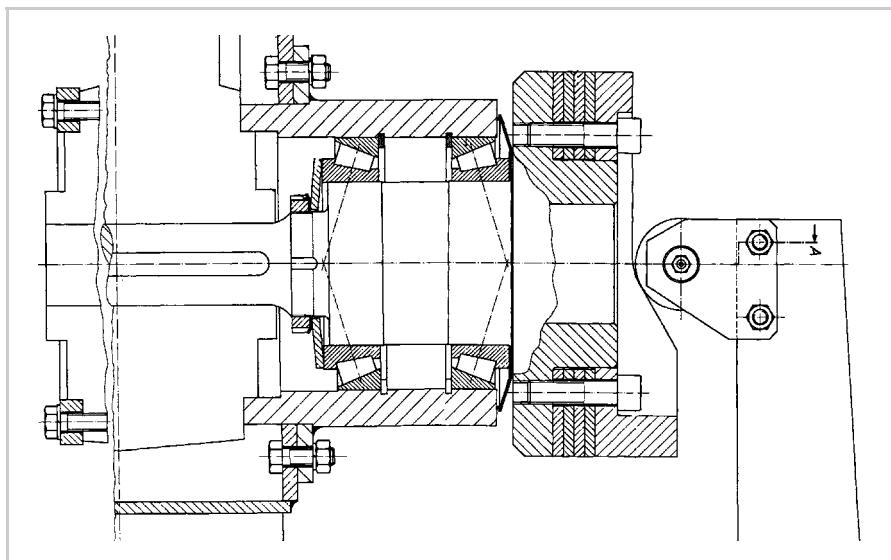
Detailed layout of the bearing arrangement for the cylindrical cam
